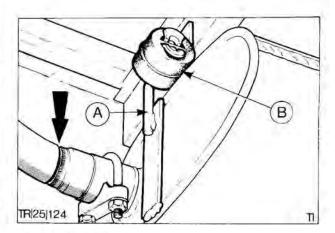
Front mounting A - Exhaust hanger B - Rubber insulator NOTE: Suitable cutting point arrowed, for all variants
